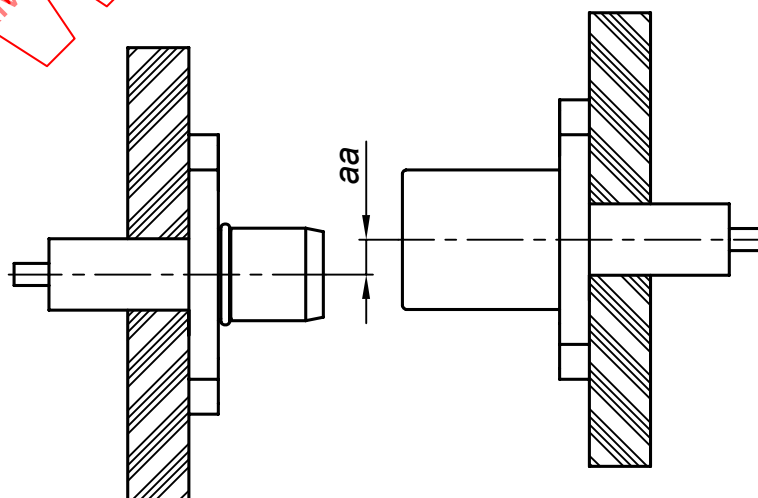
A rigidly mounted connector with socket-centre contact and a rigidly mounted connector with pin-centre contact radial misalignment limits
